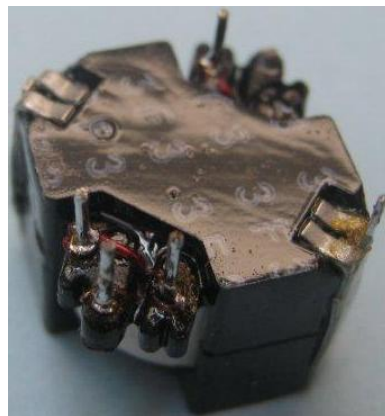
Sample Choke Illustration for Bottom Actual View.
